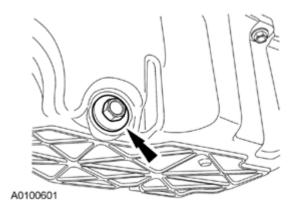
Locating Engine Oil Pan Drain Plug Courtesy of FORD MOTOR CO.
